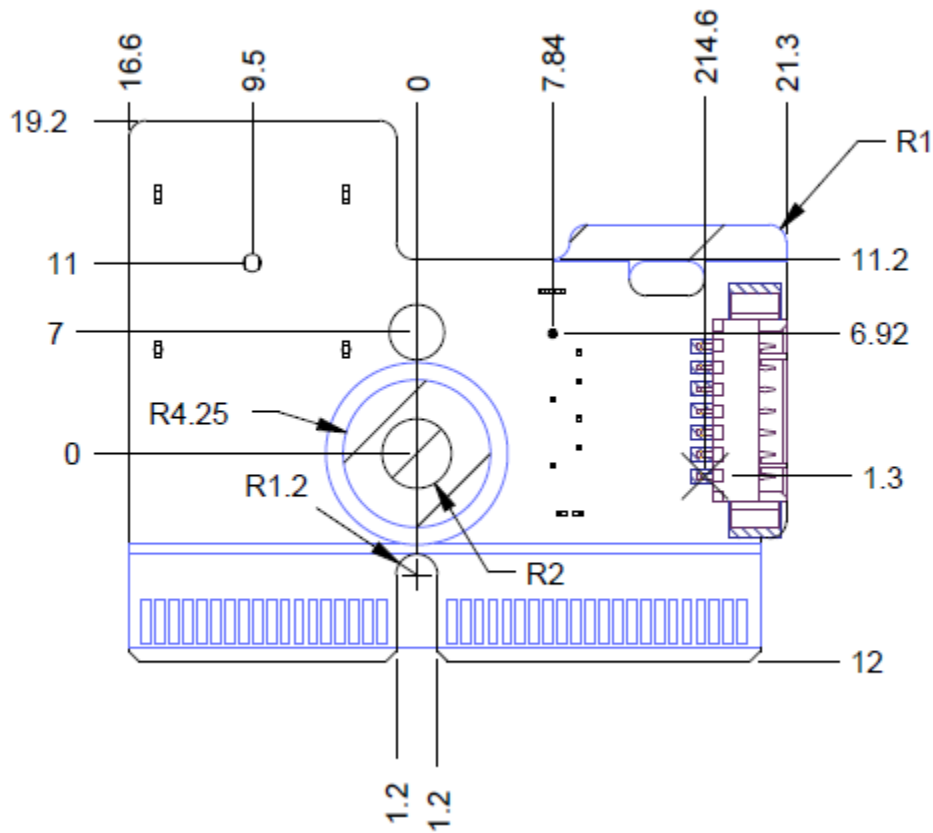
Breakout Board Mechanical Drawing (Unit: mm)
